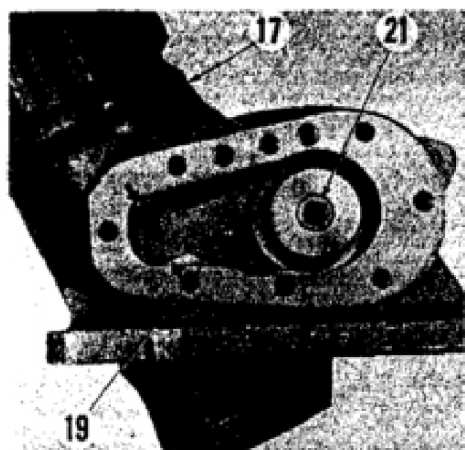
Rocker shaft can be withdrawn when arm is centered in housing opening as shown. Refer to Fig. 27 for parts identification.
